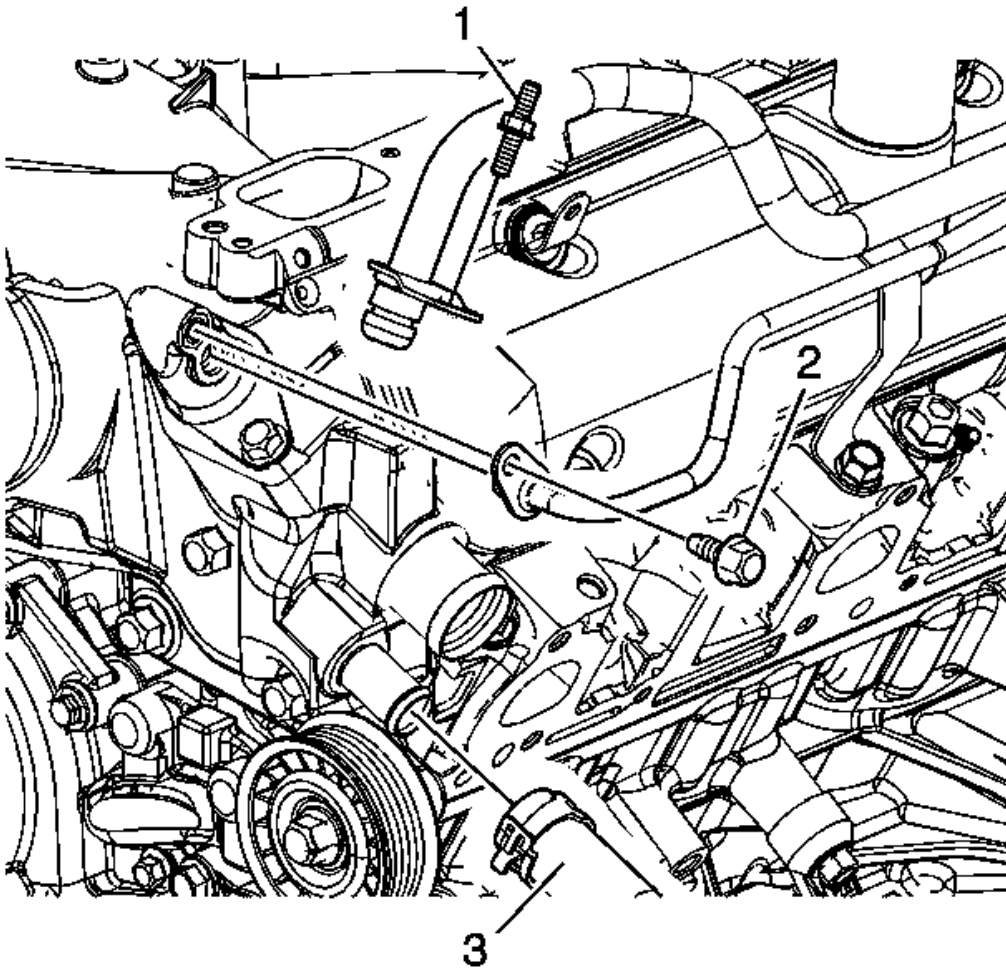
Identifying Thermal Bypass Hose & Clamp
